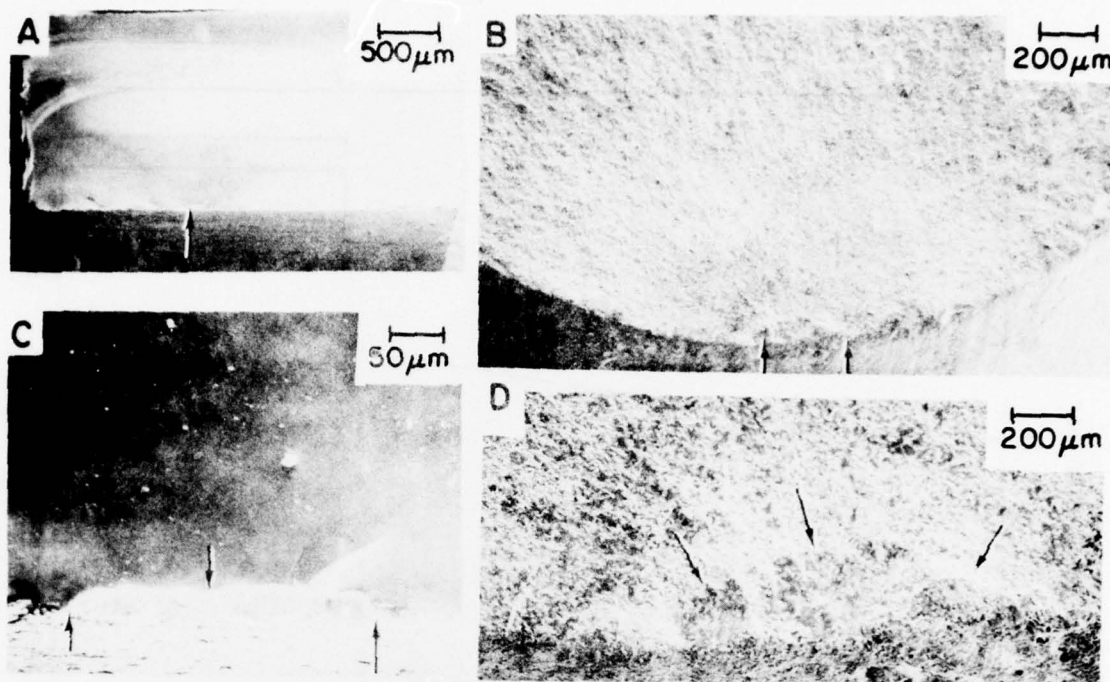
Example of machining flaws in Al_2O_3 . A and B) Machining flaw at the fracture origin of a sapphire laboratory test bar failing at 138 MPa (20,000 psi). C and D) Flaw at the fracture origin of a circumferentially machined large hot pressed Al_2O_3 tensile specimen having a gauge diameter of 14.4 mm, failure stress 275 MPa (40,000 psi). Note elongated flaws (arrows) due to machining perpendicular to the tensile axis in both samples.
